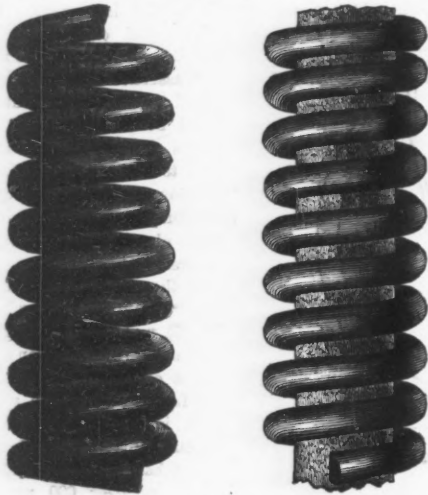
Union Steel Spiral for Car Springs. Fig. 6.—Union Steel Spiral Spring, with Wool Packing.
